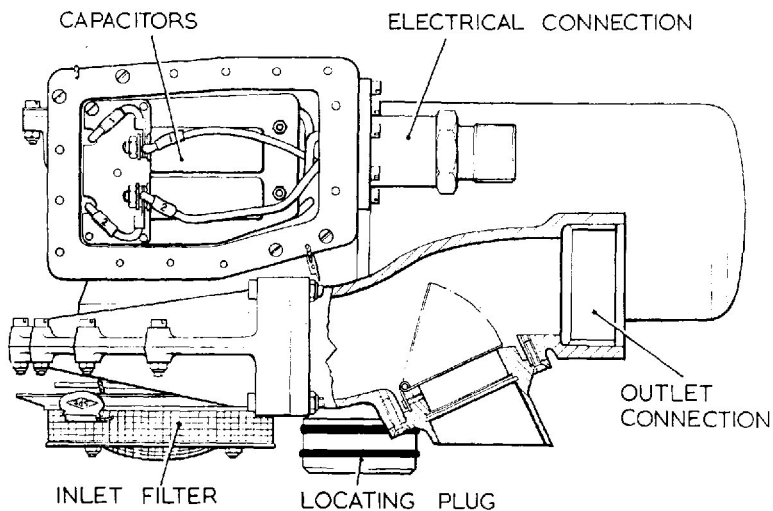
Sectional view of SPE.802B Mk. 3, showing delivery outlet and by-pass valve assembly
